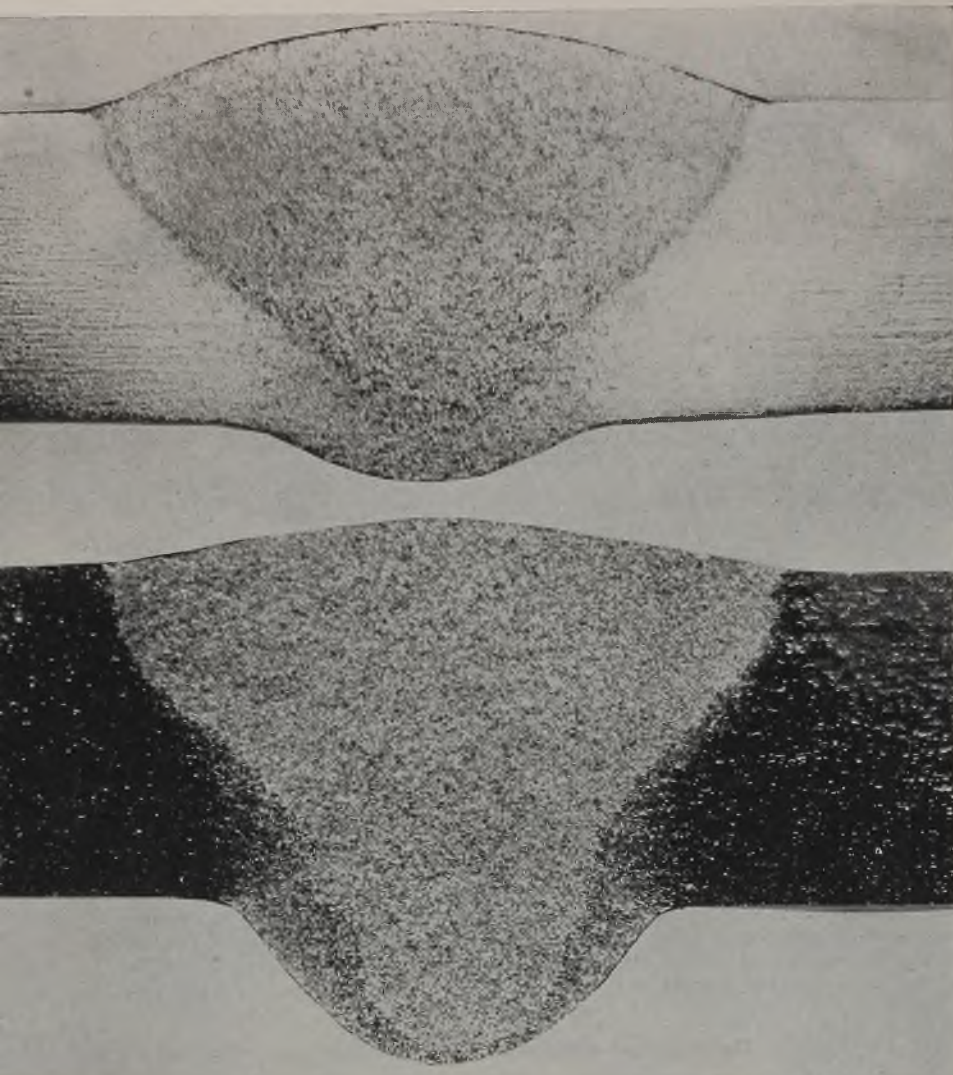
Macrographs of helium-shielded arc welds on light-gage magnesium. Upper weld made without reverse bevel, lower with reverse bevel
